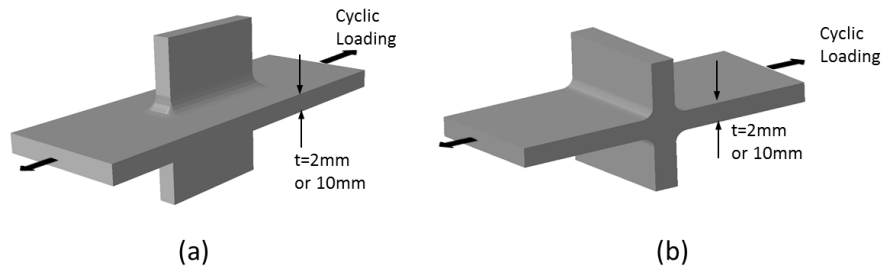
Joint geometry and cyclic loading conditions [10]: (a) TIG welded longitudinal gusset joint; (b) TIG welded cruciform joint;
